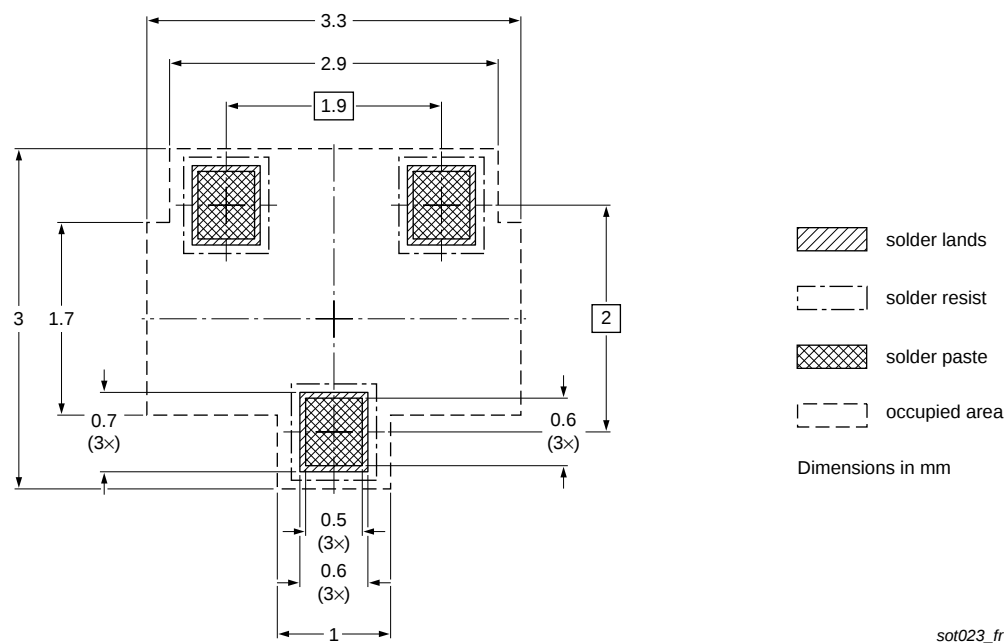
Reflow soldering footprint for SOT23 (TO-236AB)
